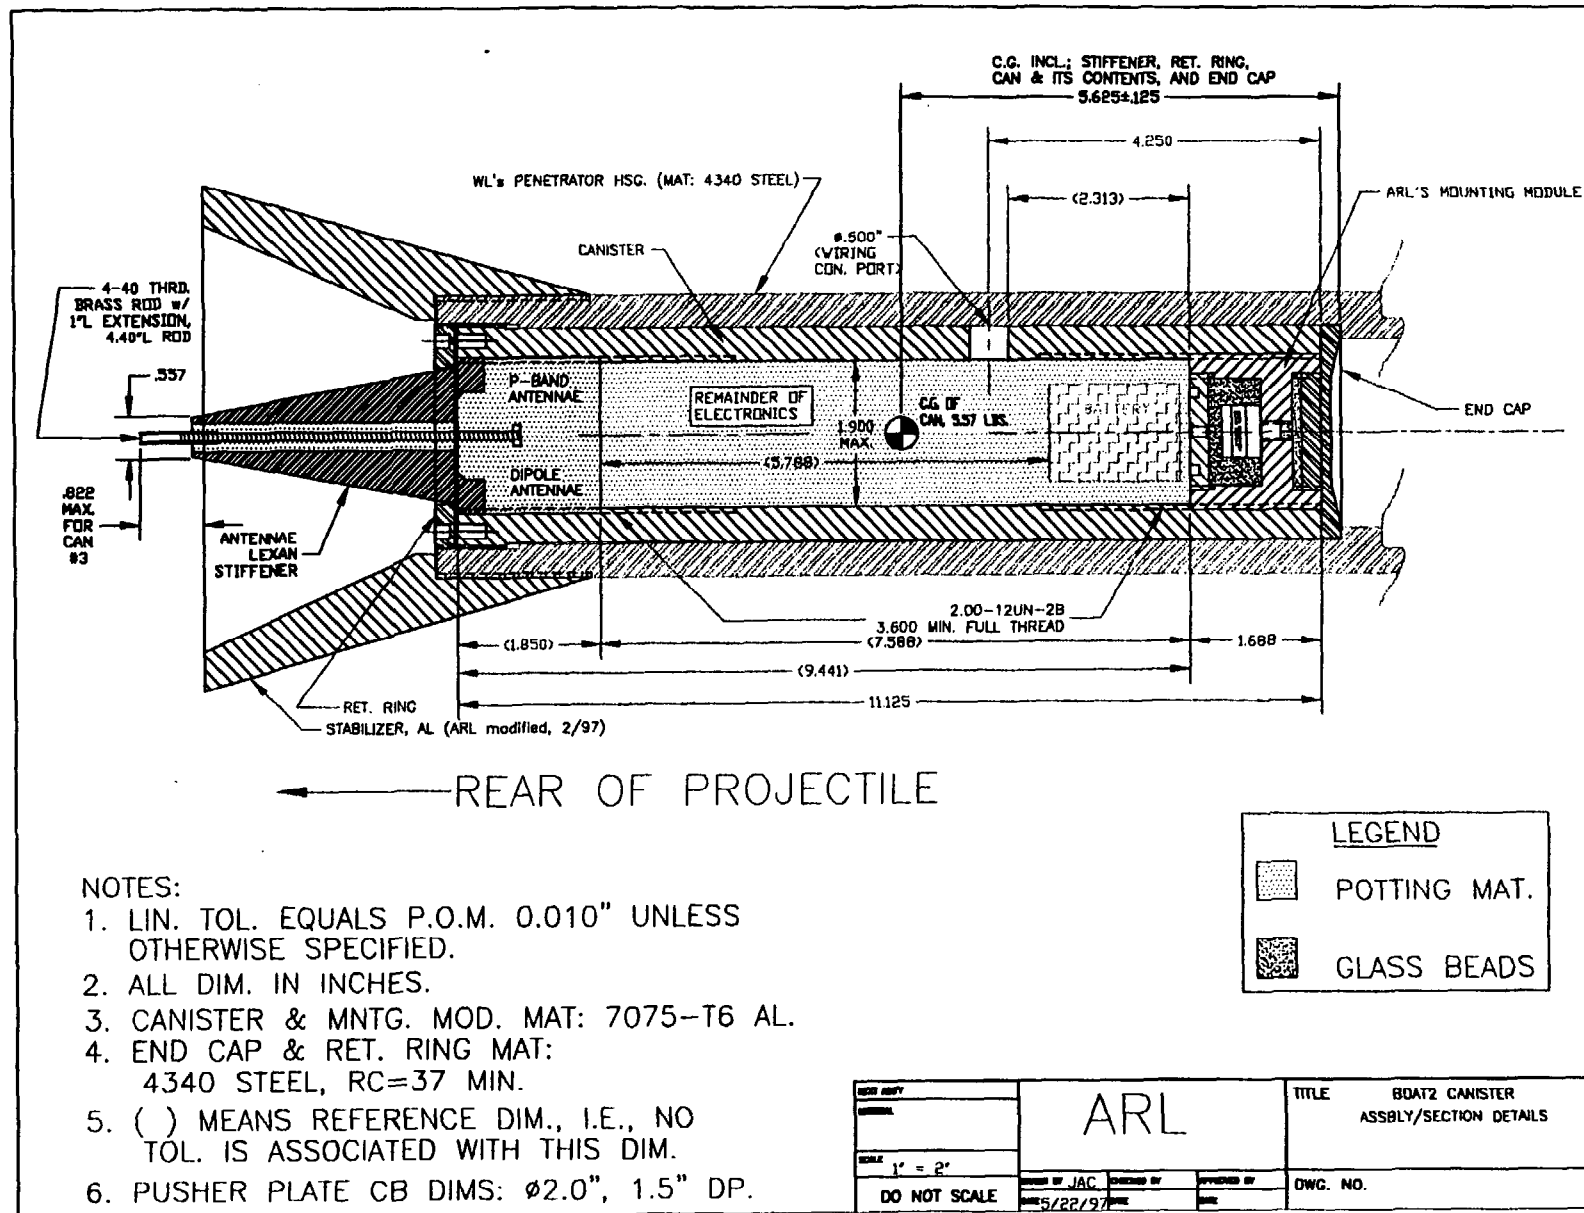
Mechanical Drawing of the Telemetry Canister Inserted in the Projectile.
